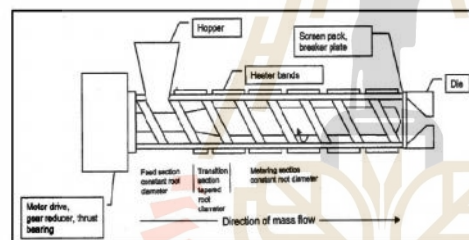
Heating barrels and co-rotating screws for hot-melt extruder [6]
